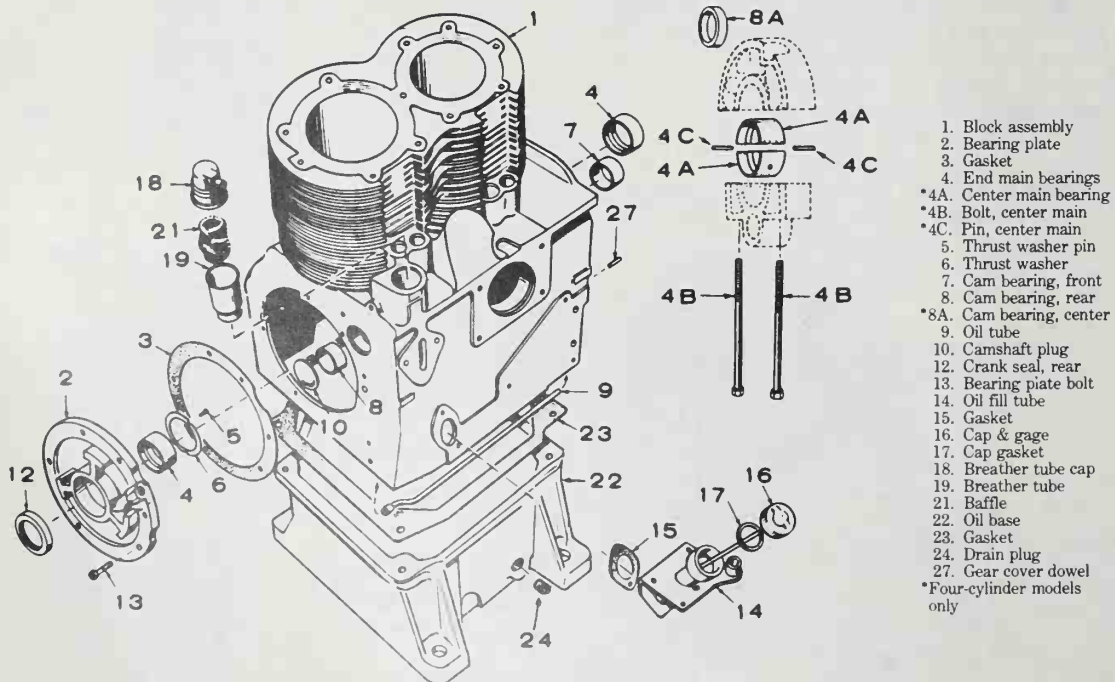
Exploded view of cylinder, crankshaft and oil base assemblies typical of this engine series. Model DJBA is shown.
